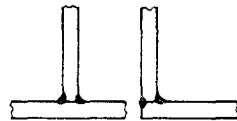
Welding in T shape and in L shape on both sides.
